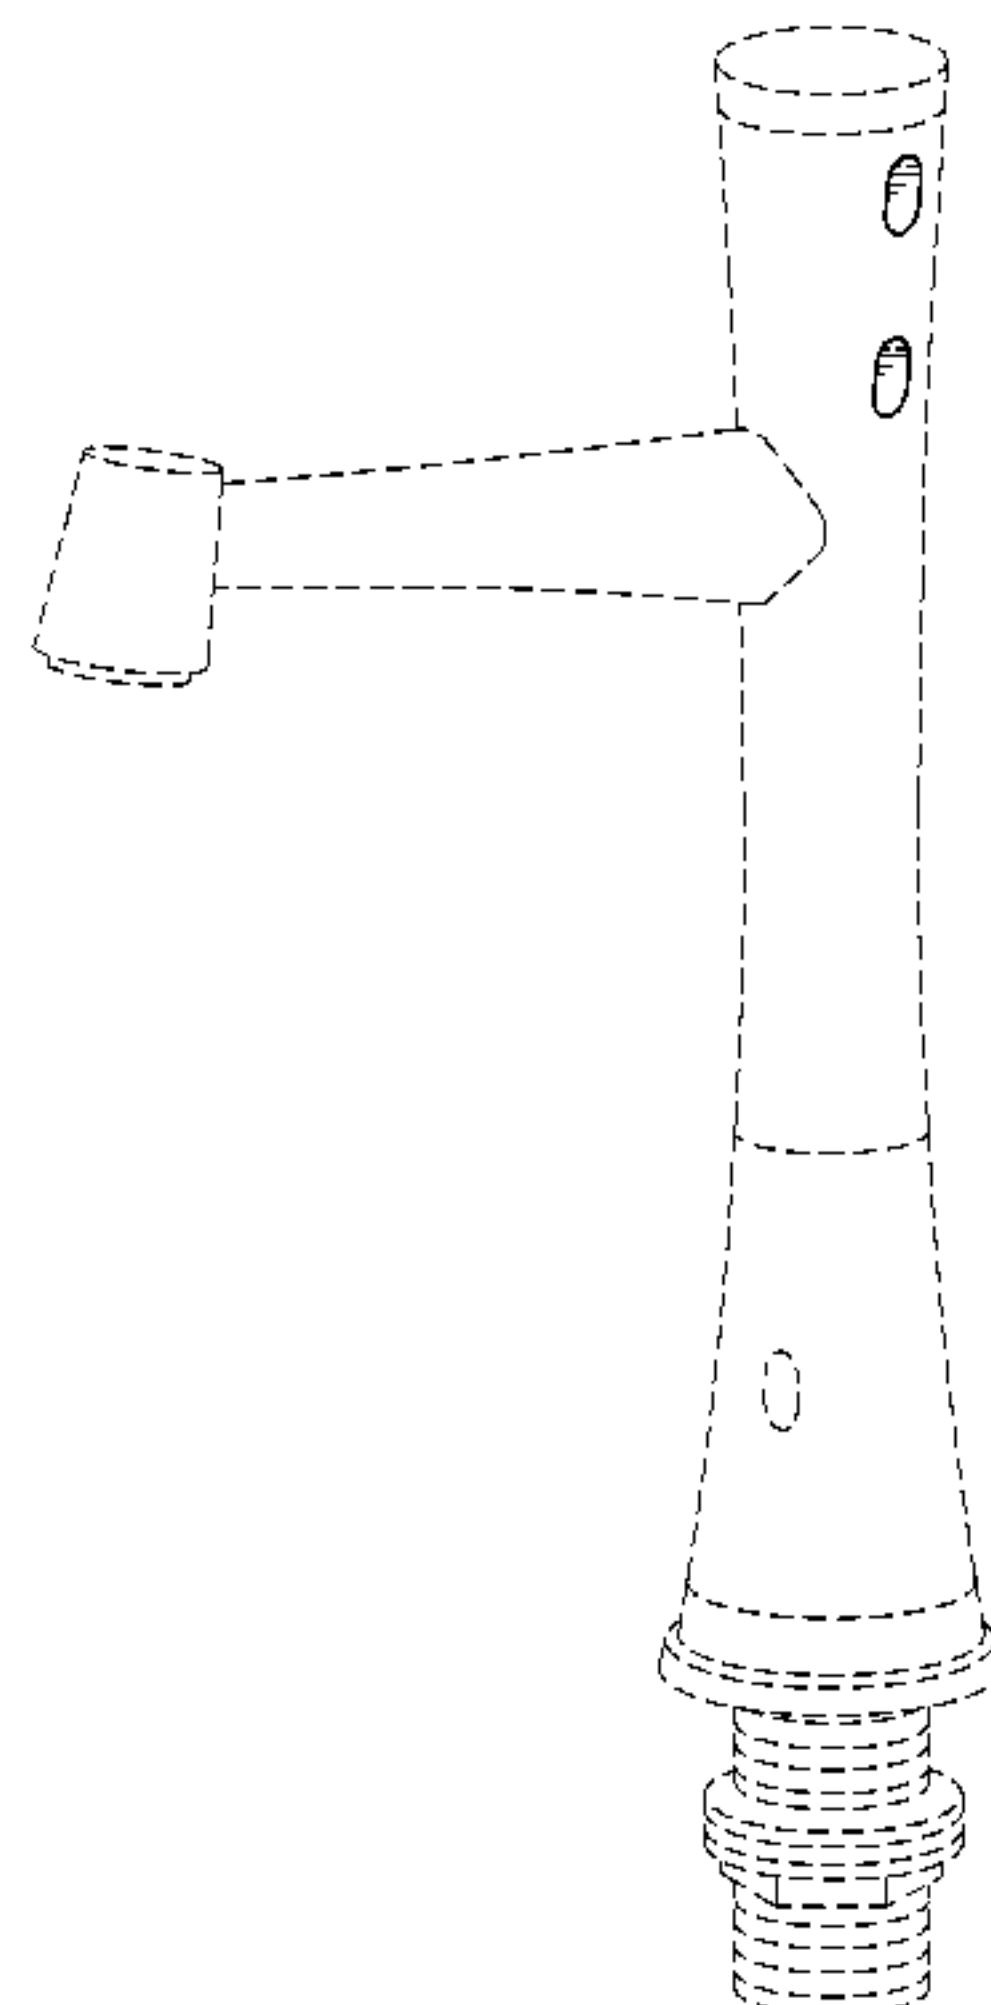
is a left elevation view of the second embodiment of the sensor assembly for touch-free faucet;
